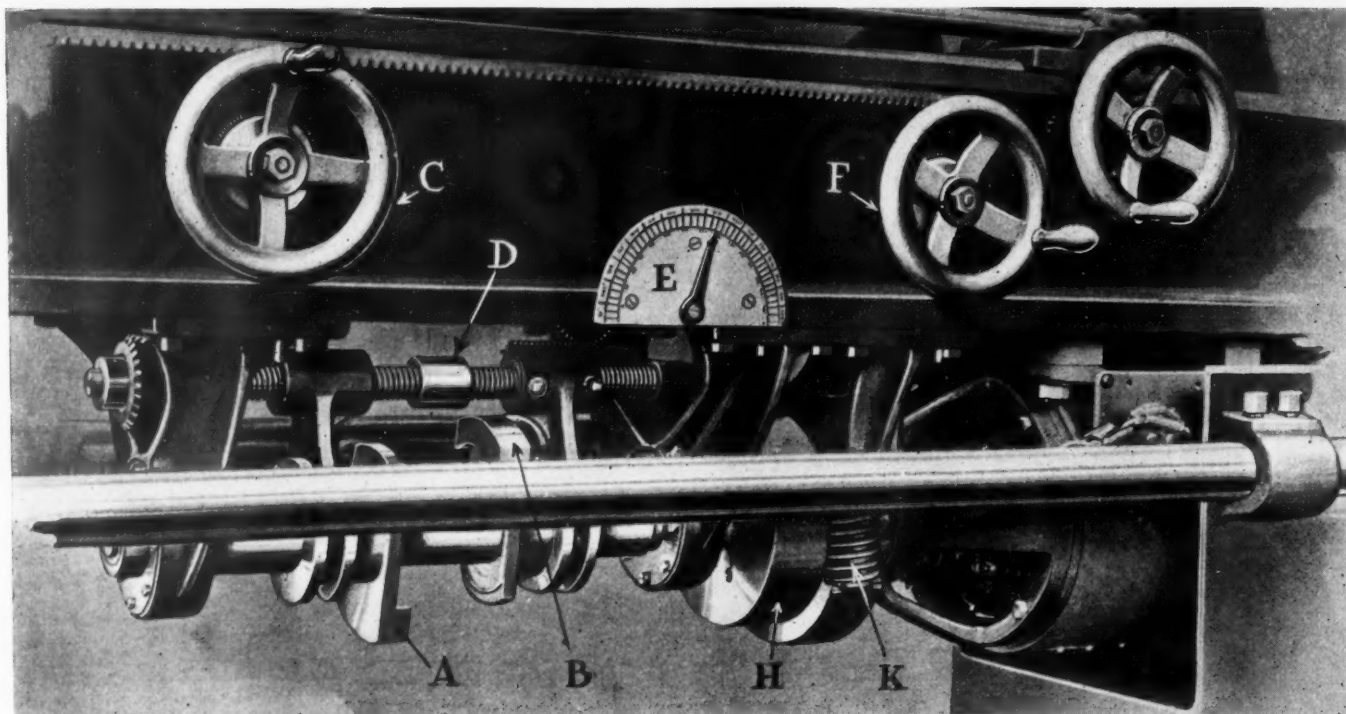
Details of redesigned Akimoff machine. A and B are the adjustable masses for finding the unbalance of the object to be tested. C and F are the only controls which have to be moved
